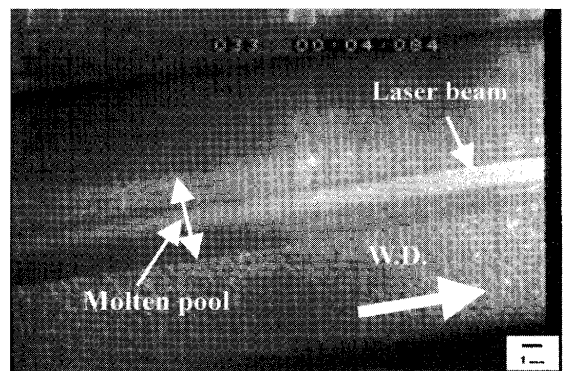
High speed photograph during welding at a welding speed of 4.8m/min
